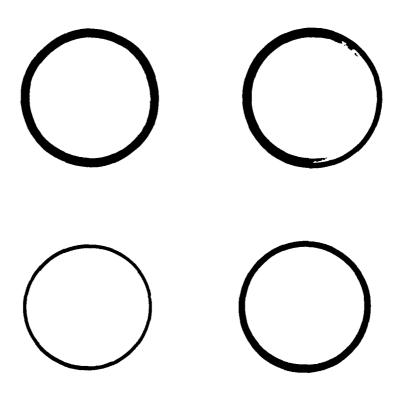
SHAMBAN S37573 SEAL ASSEMBLY
